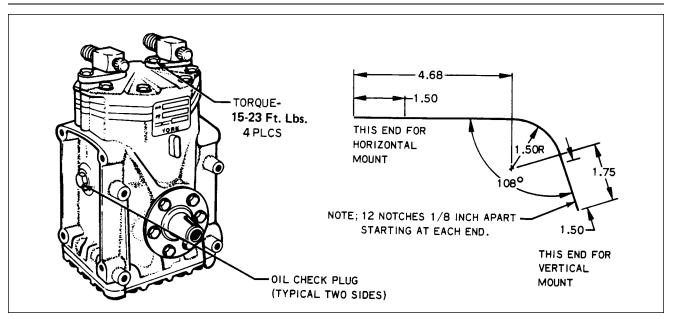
York Compressor and Fabricated Oil Dipstick (PA-28R-201)
